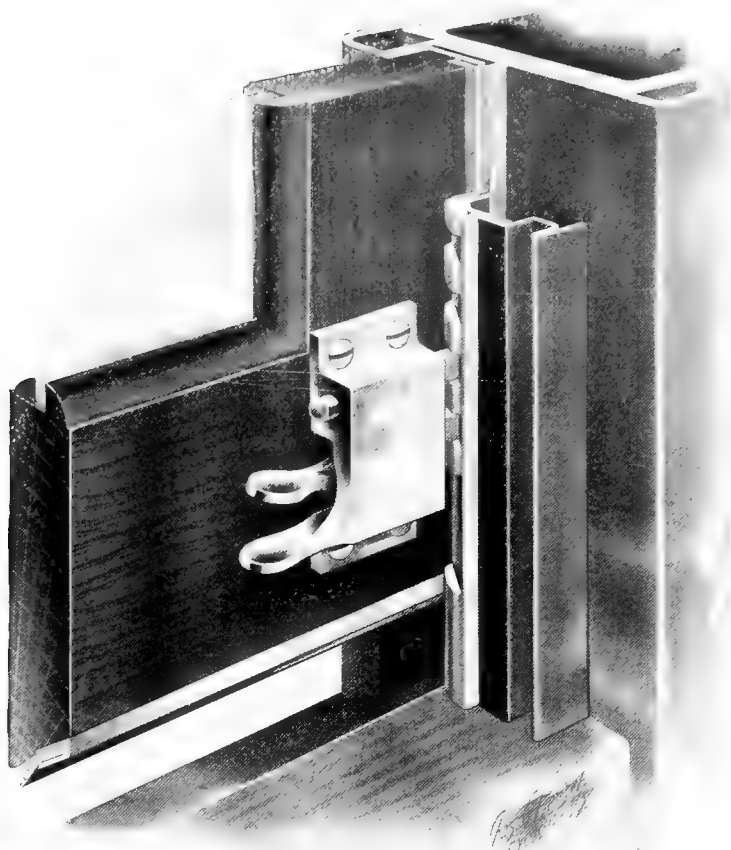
Edwards No. 7 Lock and Brass Bar with Metal Stop Casing and Side and Bottom Weather Stripping, Used on Steel Cars, Unbalanced Sash.
